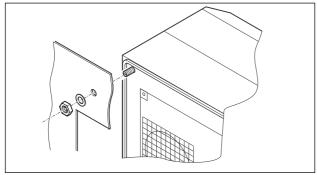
Secure the cooling unit (all models except SK 3302.1xx)
